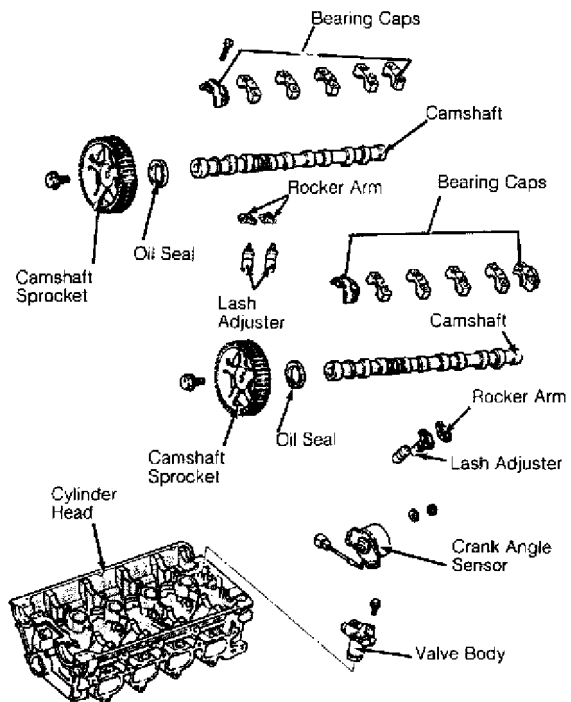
Exploded View Of Camshaft Assembly (1.6L)
